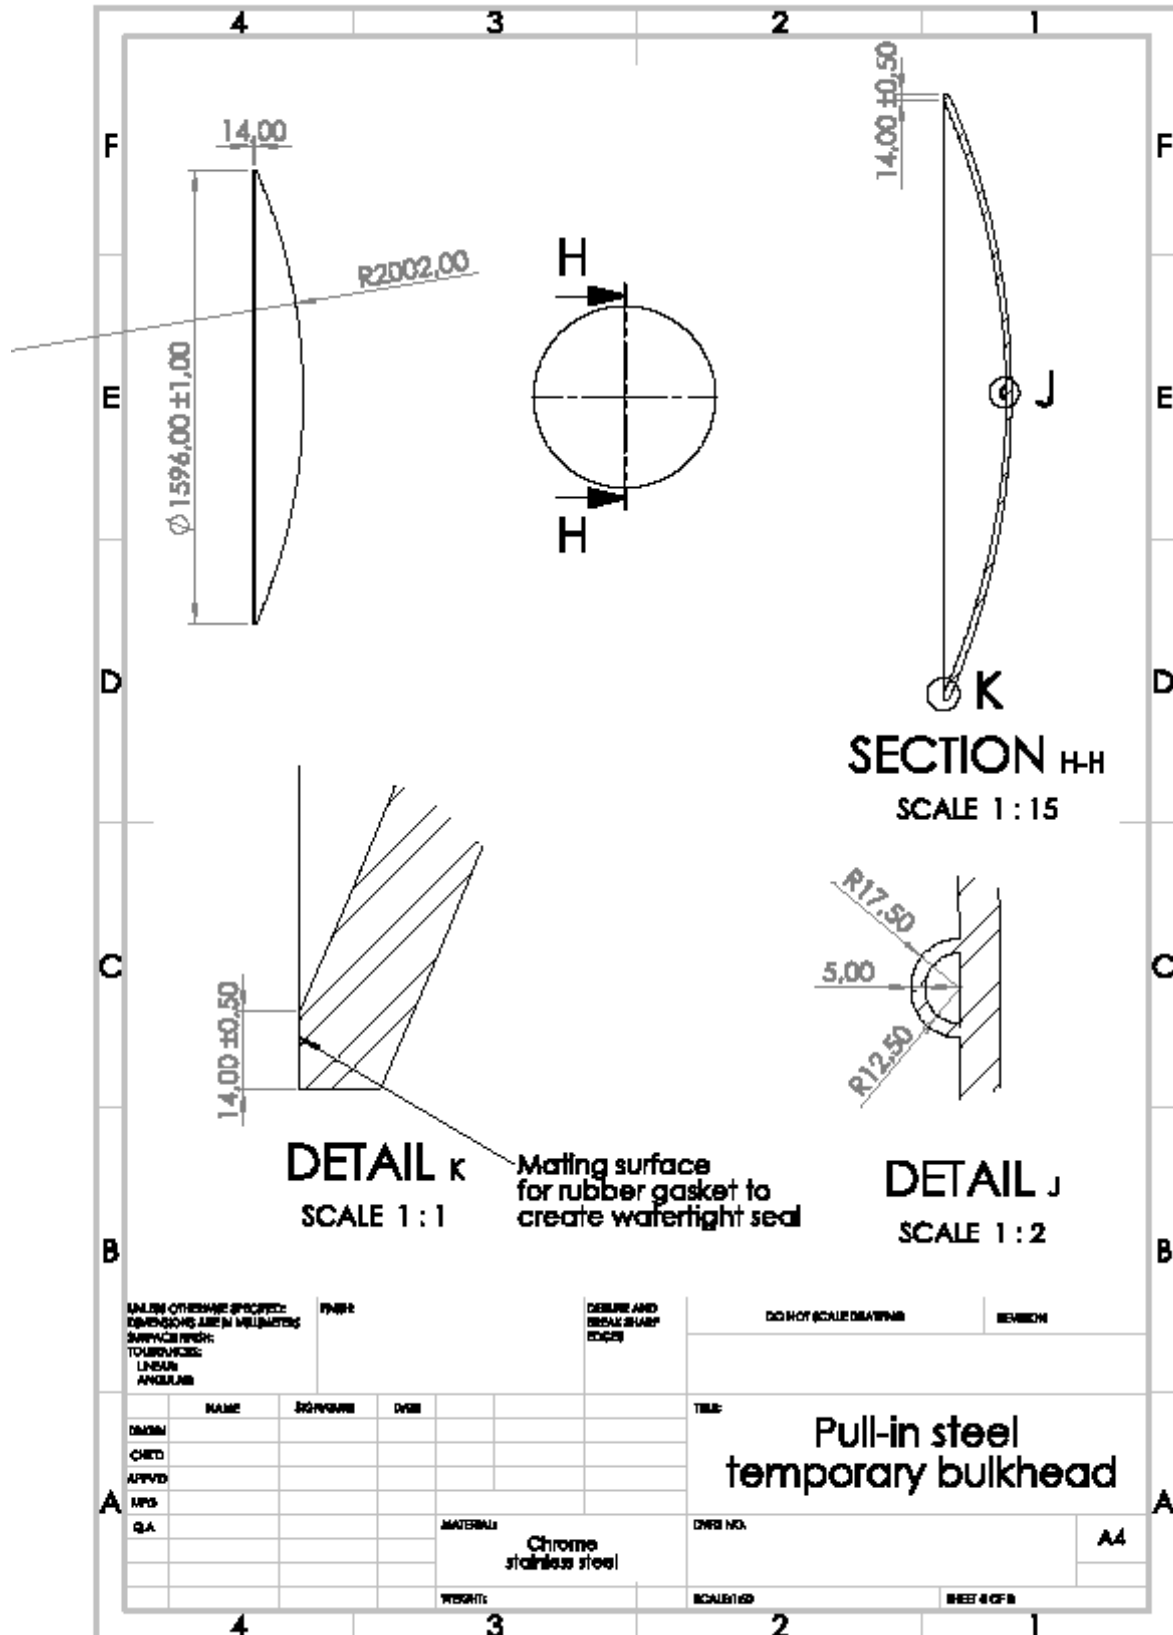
2D technical drawing of the water passage pull-in steel temporary bulkhead
